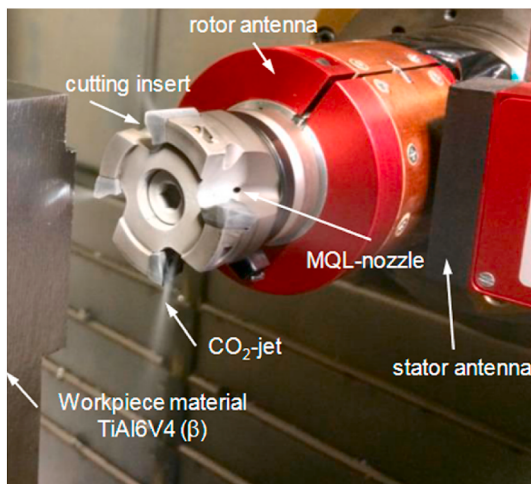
Horizontal CNC milling cutter illustrating CO₂ and MQL jets through inbuilt internal cooling channels [65].
